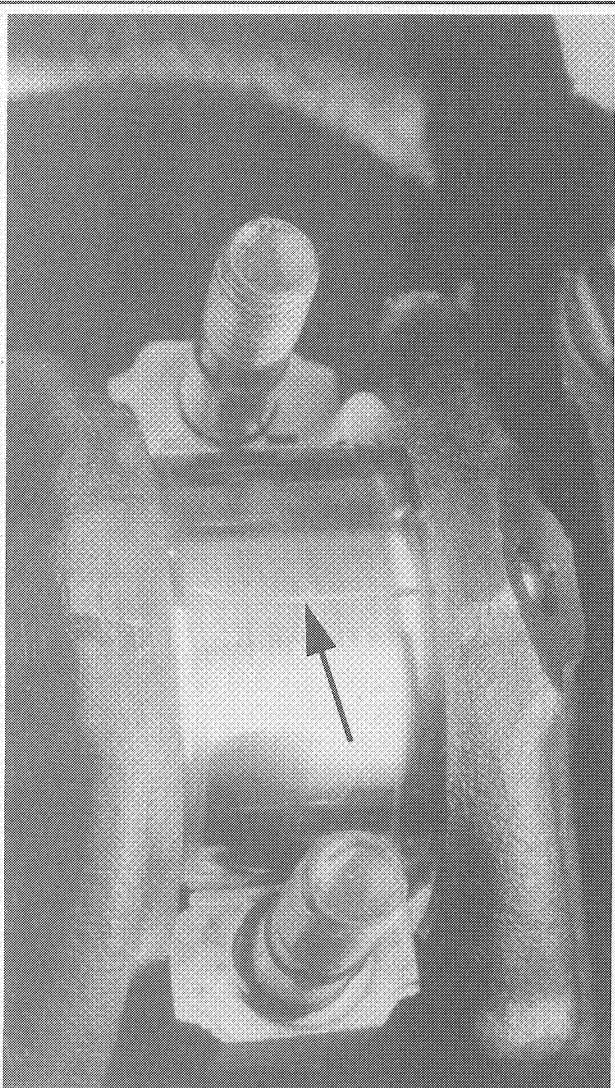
Apply a strip of gauging material to the bearing journal, then install and torque the cap
